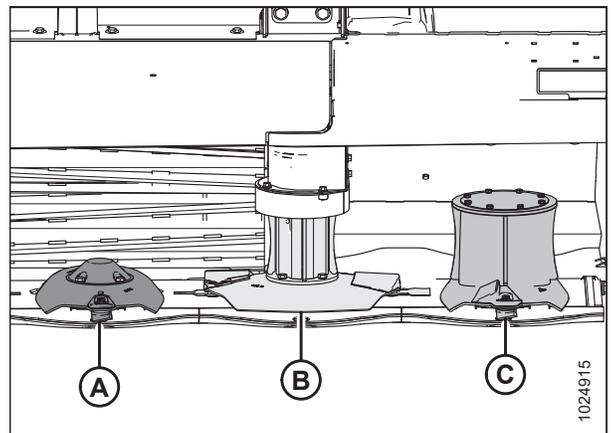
Cutterbar Disc Assemblies – R116 PT Shown, R113 PT similar
